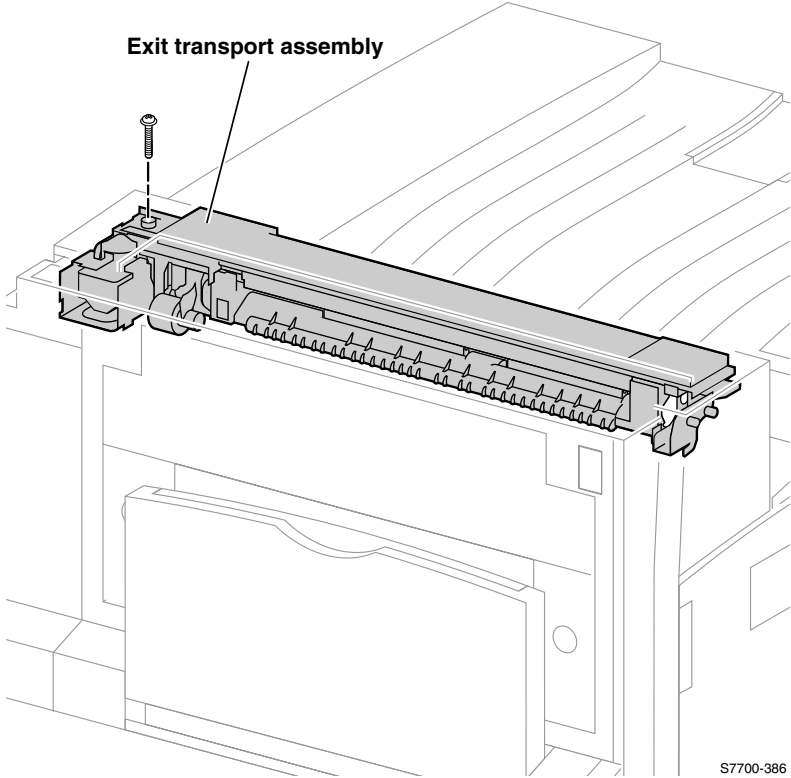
Assemblies of the Print Engine (cont'd.)
